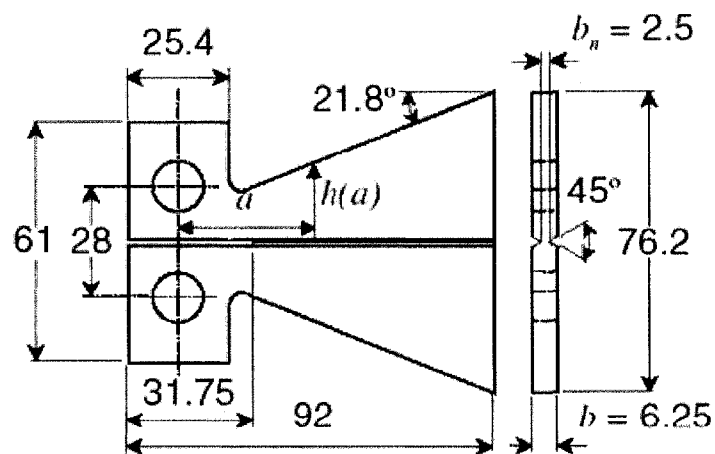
TCBD geometry. Dimensions in mm.⁵
